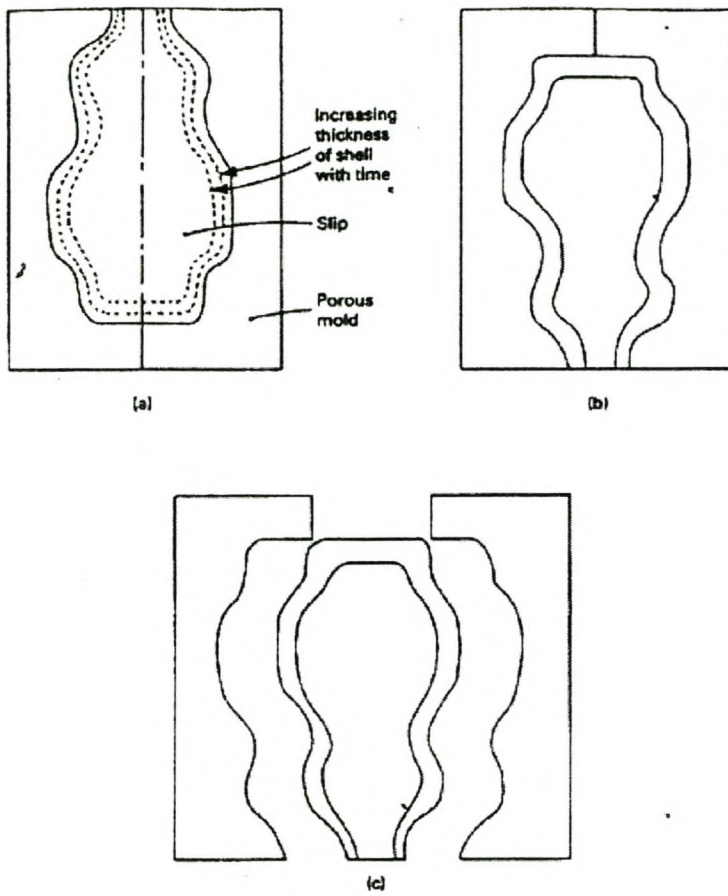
Processing of hollow ceramic products by slip casting. (a) Pouring slip in mold and waiting for shell of required thickness to form. (b) Removing excess slip. (c) Removing green product out of mold in preparation for drying and firing. [Source: M.M. Farag, selection of Materials and Manufacturing Processes for Engineering Design]
